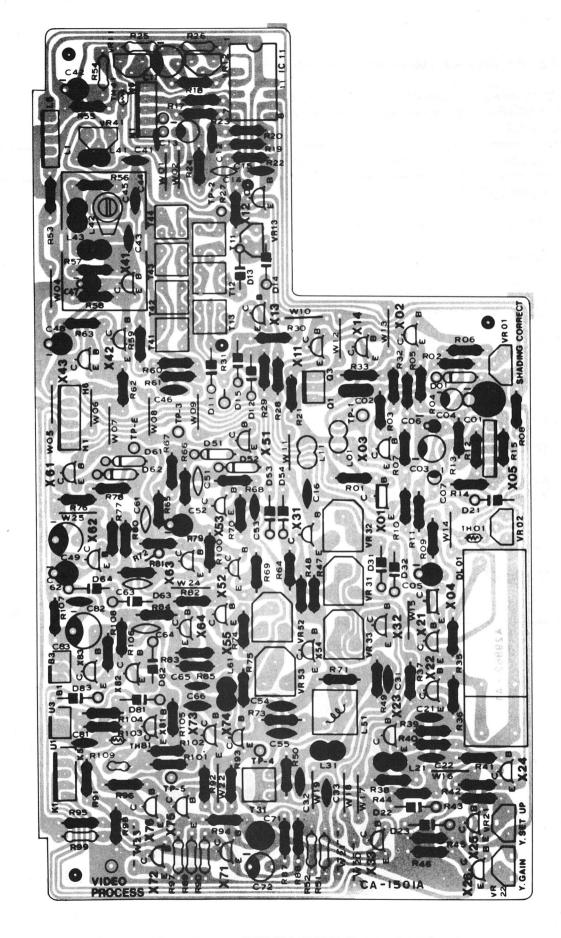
Video Process PCB (CA 1501A) Components Layout
